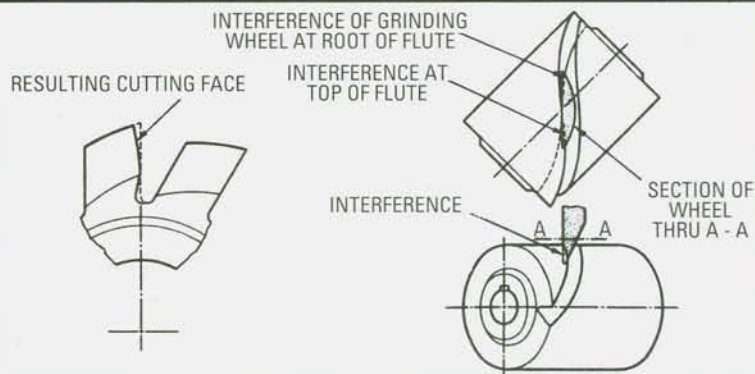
In sharpening hobs with helical flutes, the cone side of the wheel must be used to avoid interference.
